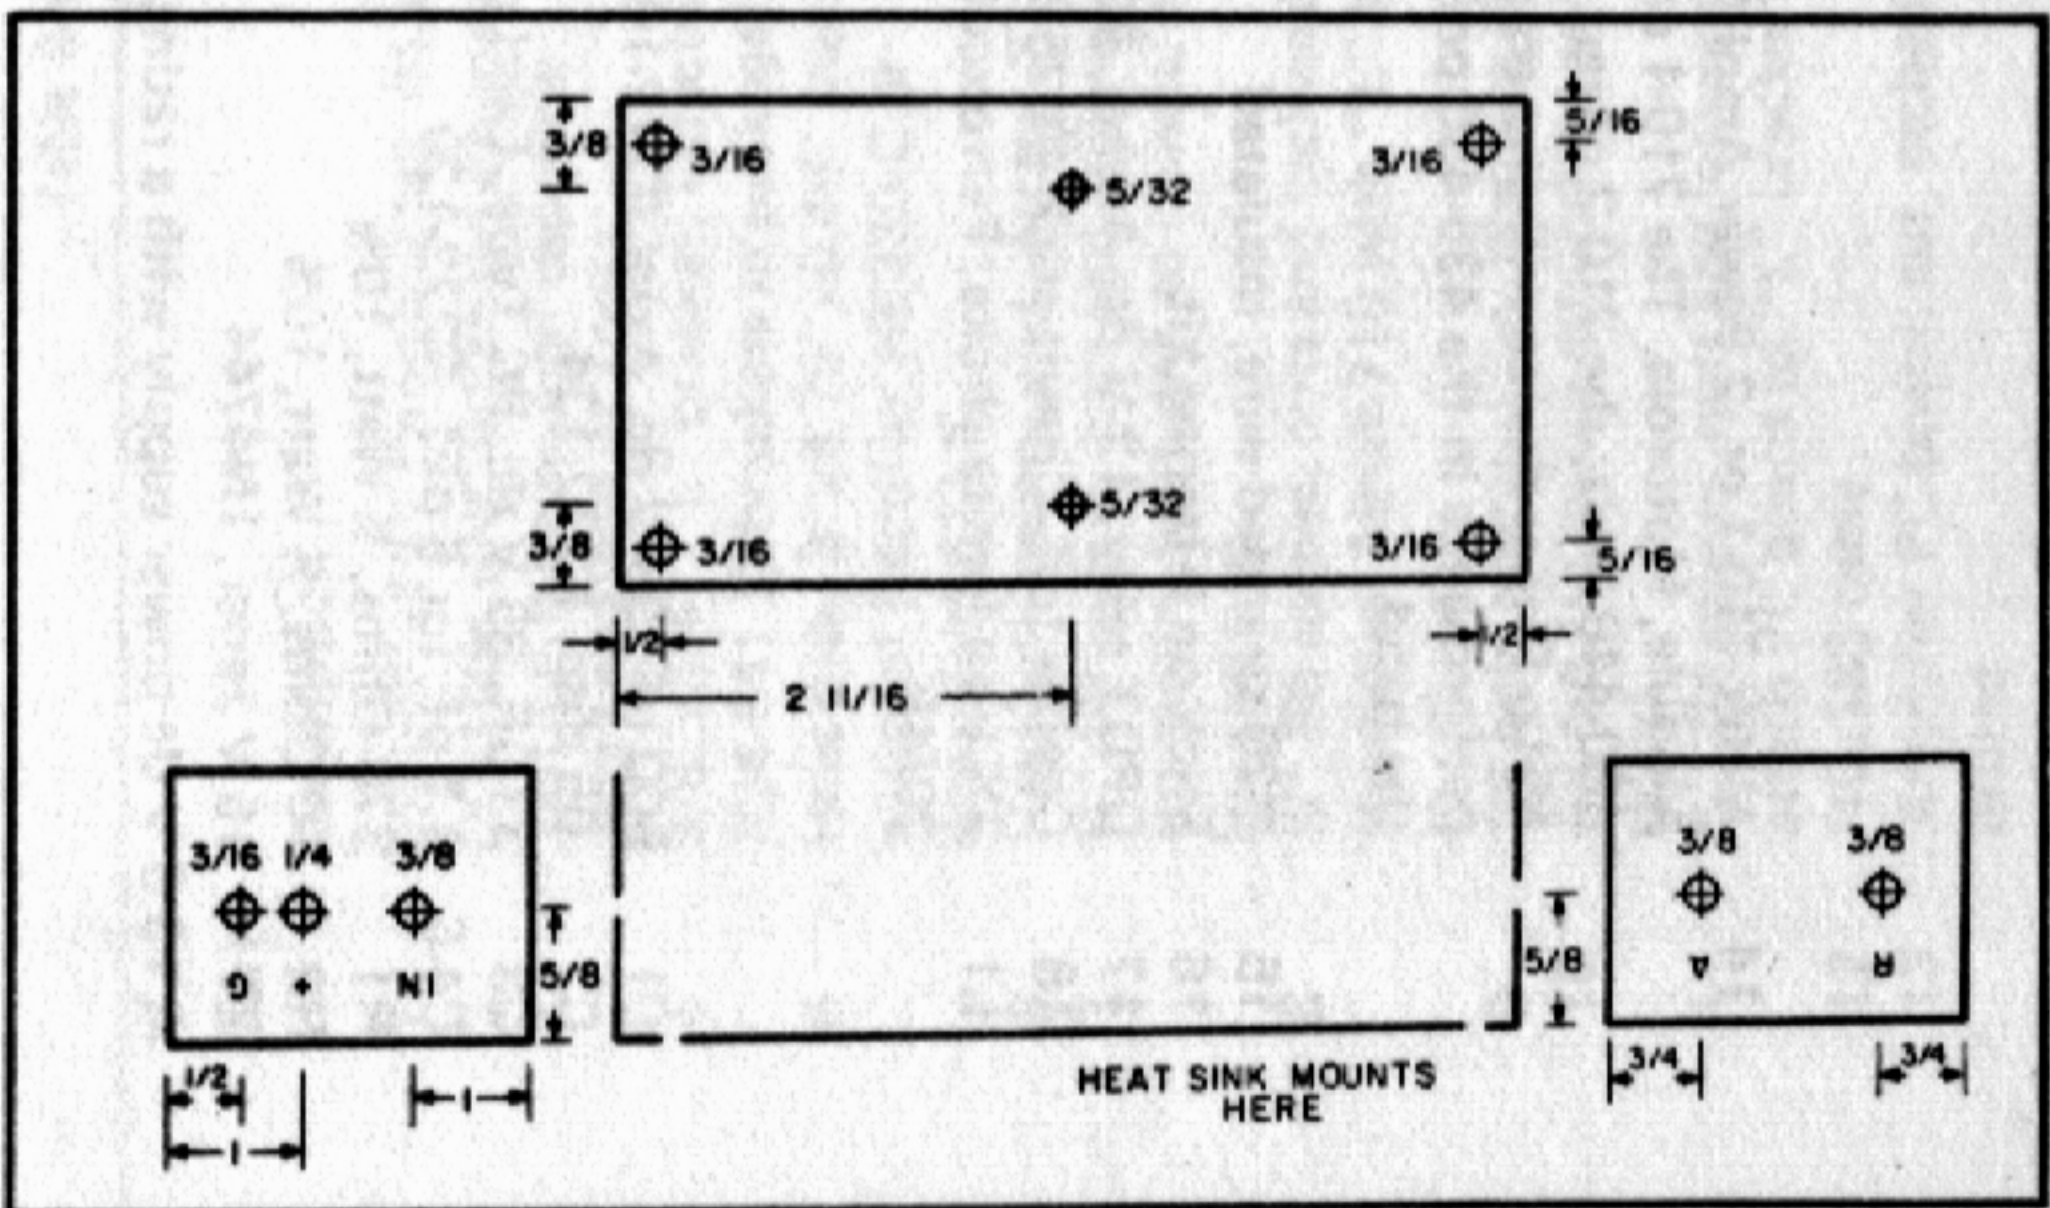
ATV 10 watt amplifier chassis drill guide. Notes: All dimensions are in inches. All measurements are from outside edge of chassis. Chassis is LMB #139. Guide is not drawn to scale.
